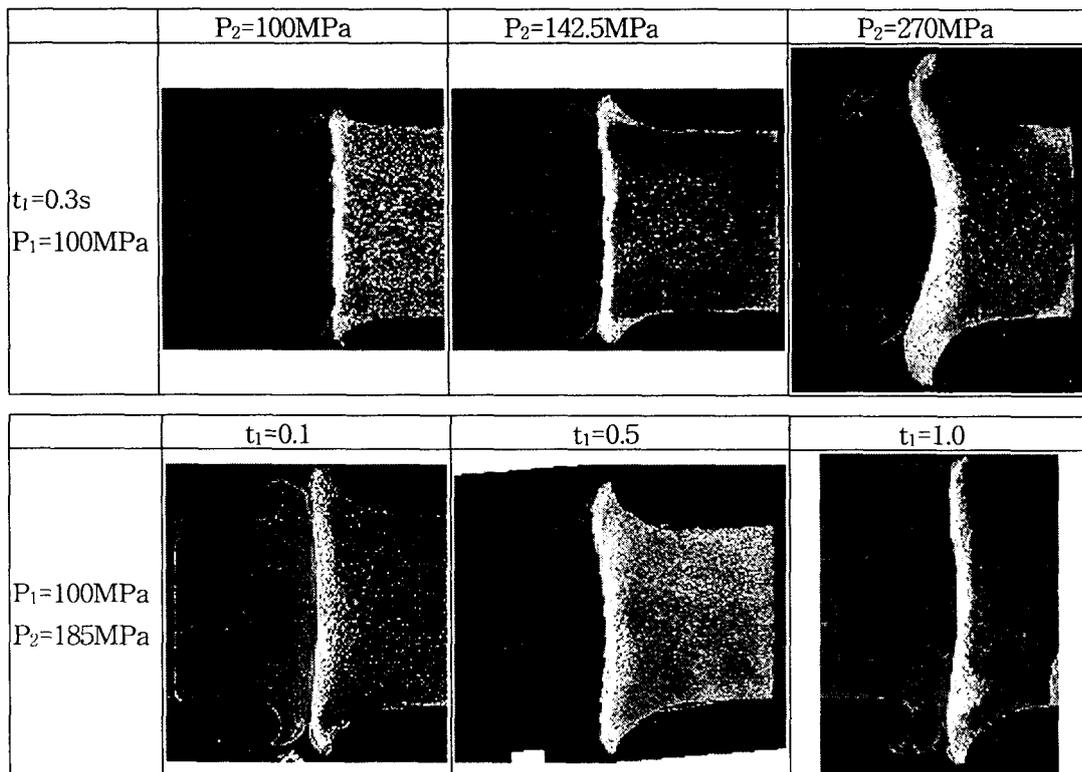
Appearance of friction welded joints (left side:7075, right side:6063)
